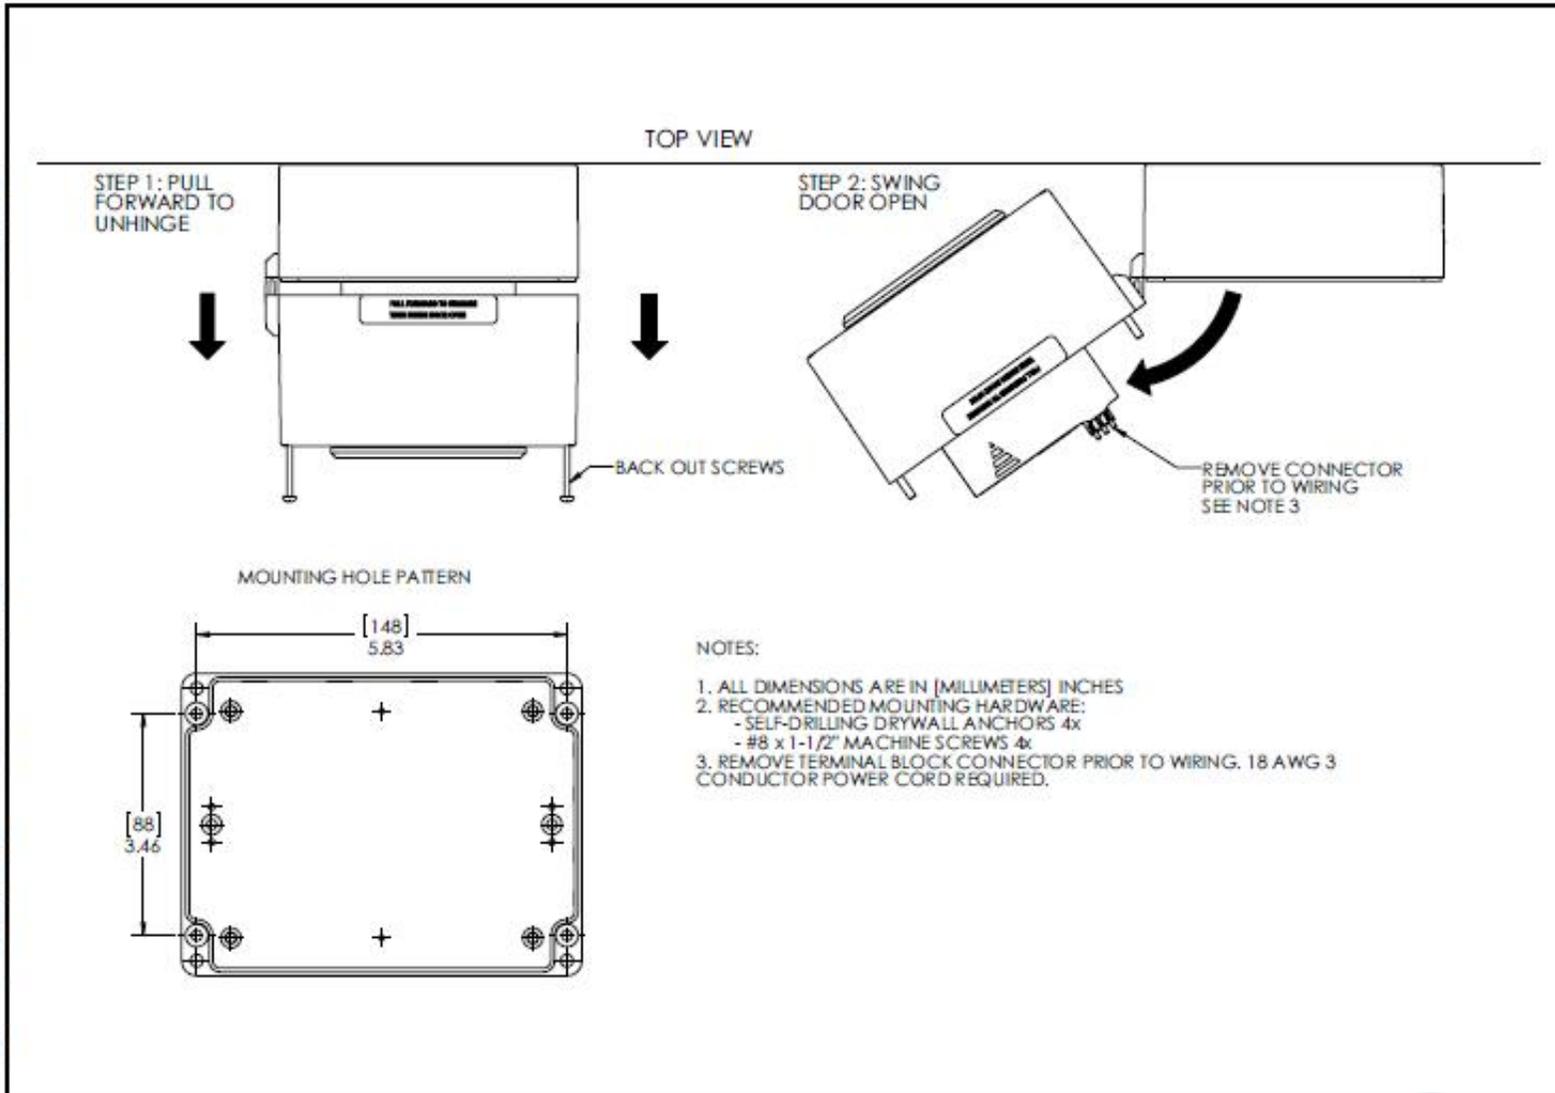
Wall Mount Outline & Installation (ref. dwg 712-1823, 2 of 3)
